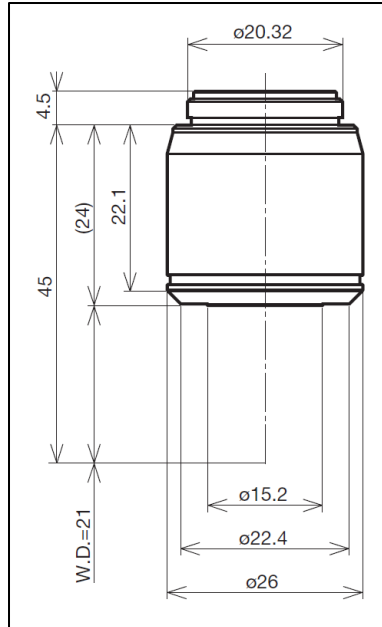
Mechanical Drawing of the LMPLFLN10X Objective [27].
